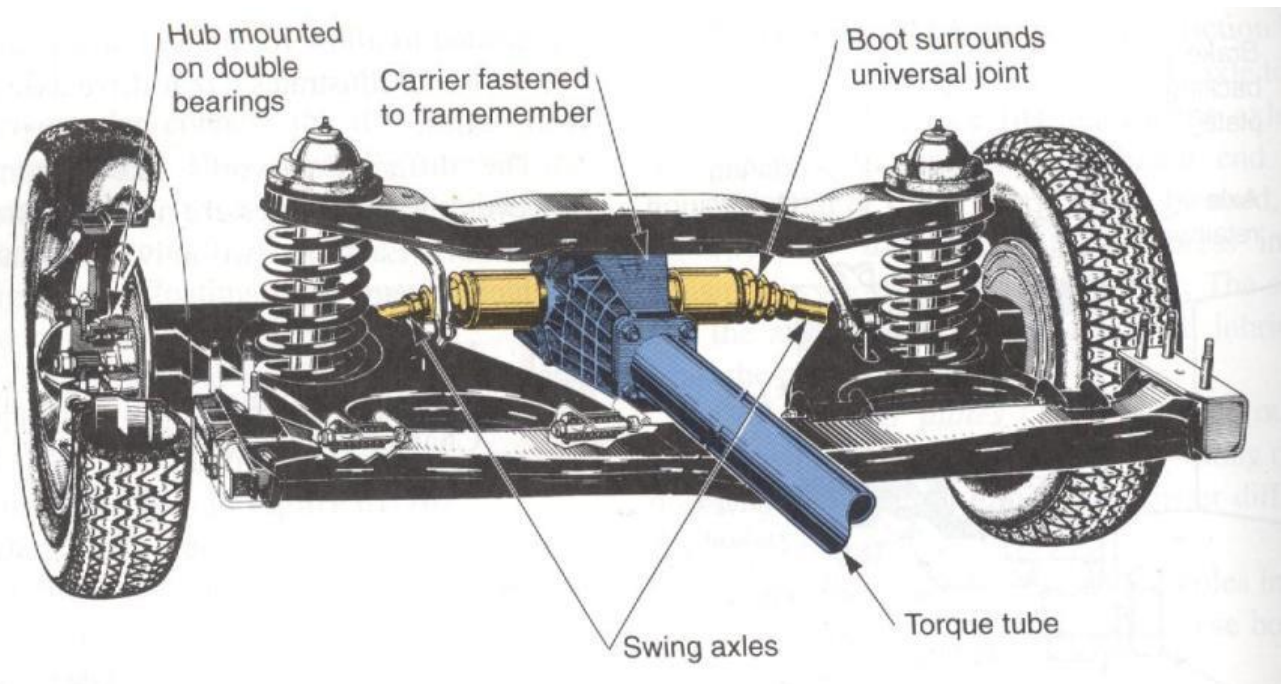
A swing axle has the differential assembly mounted on a frame member. Universal joints let the axles and wheel move up and down with suspension action.
